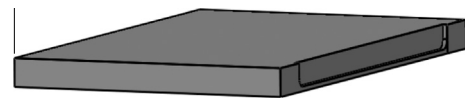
Schematic view of the profile made adjoining side of a strip.
